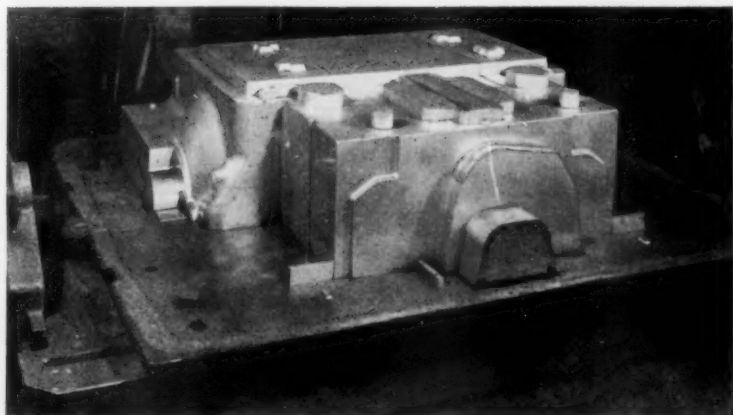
DRAG HALF OF A LARGE TRANSMISSION AS CASTING WEIGHING 3,275 LB.
